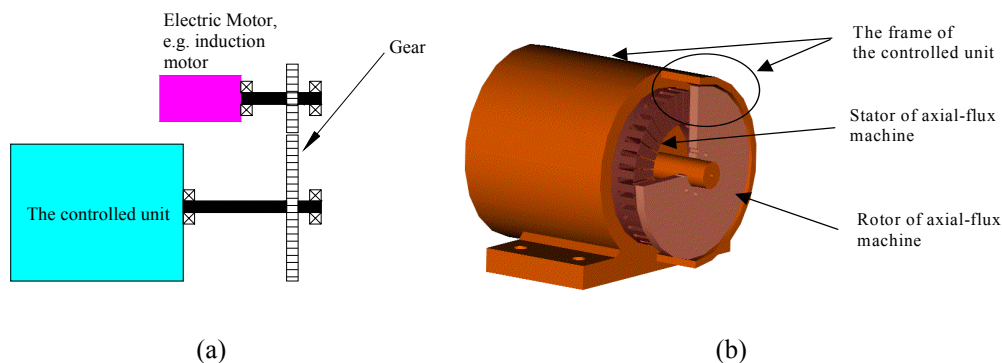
(a) Conventional electric drive system: The controlled unit is driven by the induction motor via a gear. (b) Integrated system in which the axial-flux machine may be fixed directly inside the frame structures of the controlled unit. The rotor of the electric machine is located on the same shaft as the controlled unit.
